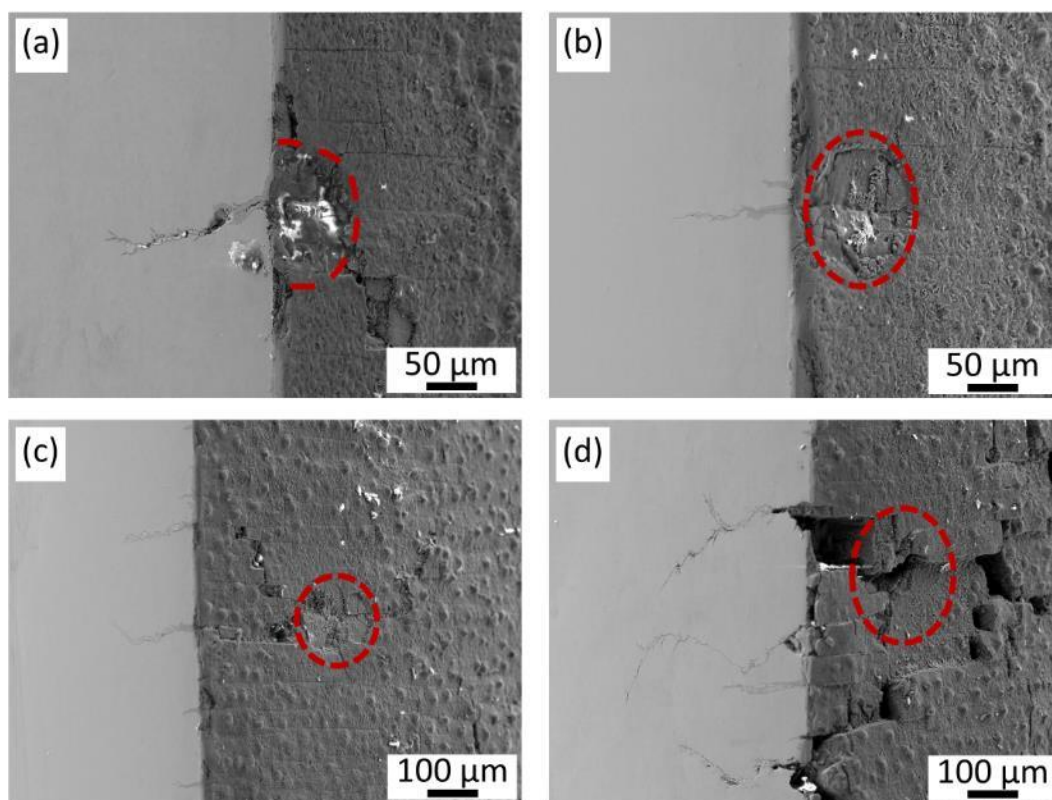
Longitudinal section of standard EUROFER97 pre-corroded specimens after LCF testing, showing the propagation of existing cracks on the imprints (marked in red) deep into the specimen [46]: (a) Imprint on the longitudinal section, (b-e) Imprint near the longitudinal section. (a-c) Imprints away from the fatigue crack, and (d) In the fracture zone. The total strain range was 1.6%.
